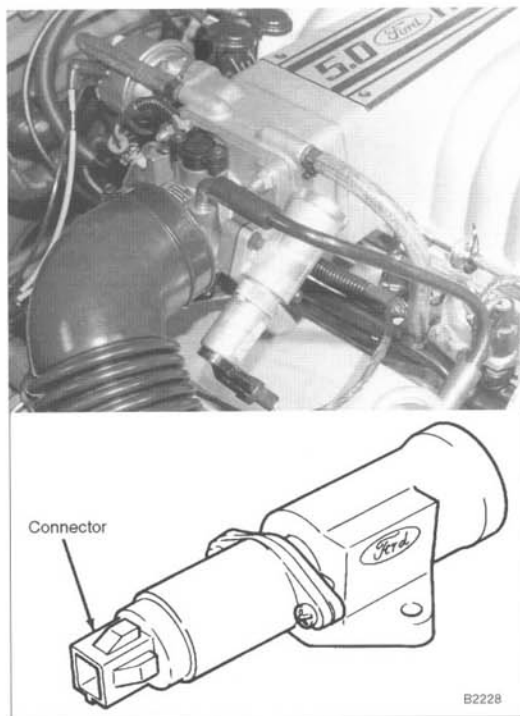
Throttle-Bypass Air (ISC) valve usually mounts on throttle body to provide a passage around throttle plate.
